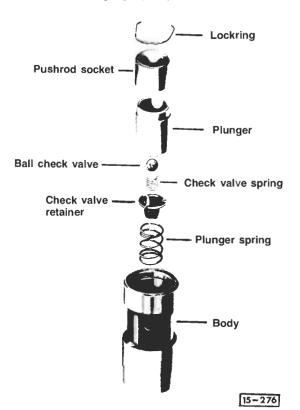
Exploded view of hydraulic lifter. Remove lockring, then separate parts. Wash components in solvent; bleed lifters during reassembly,
